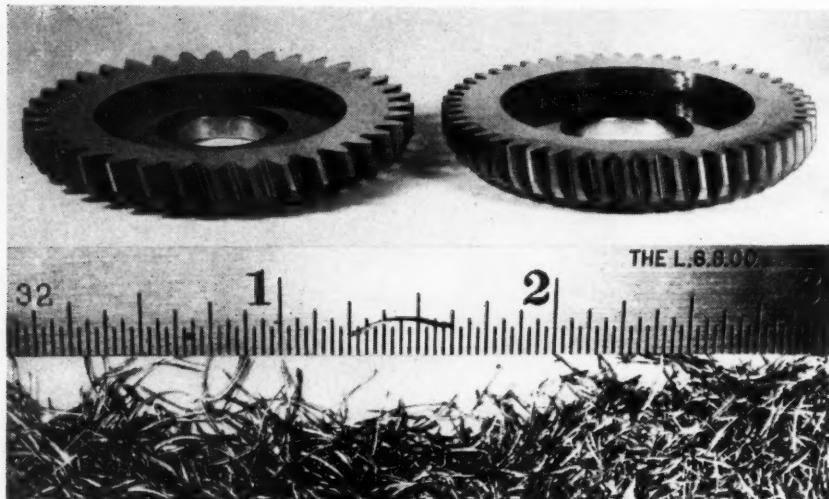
(Upper View) Cutters used on No. 12 gear finisher, the cutter at the left being employed for helical gears and that at the right for spur gears. (Lower View) Chips removed by finishing cutter, indicating free cutting action
